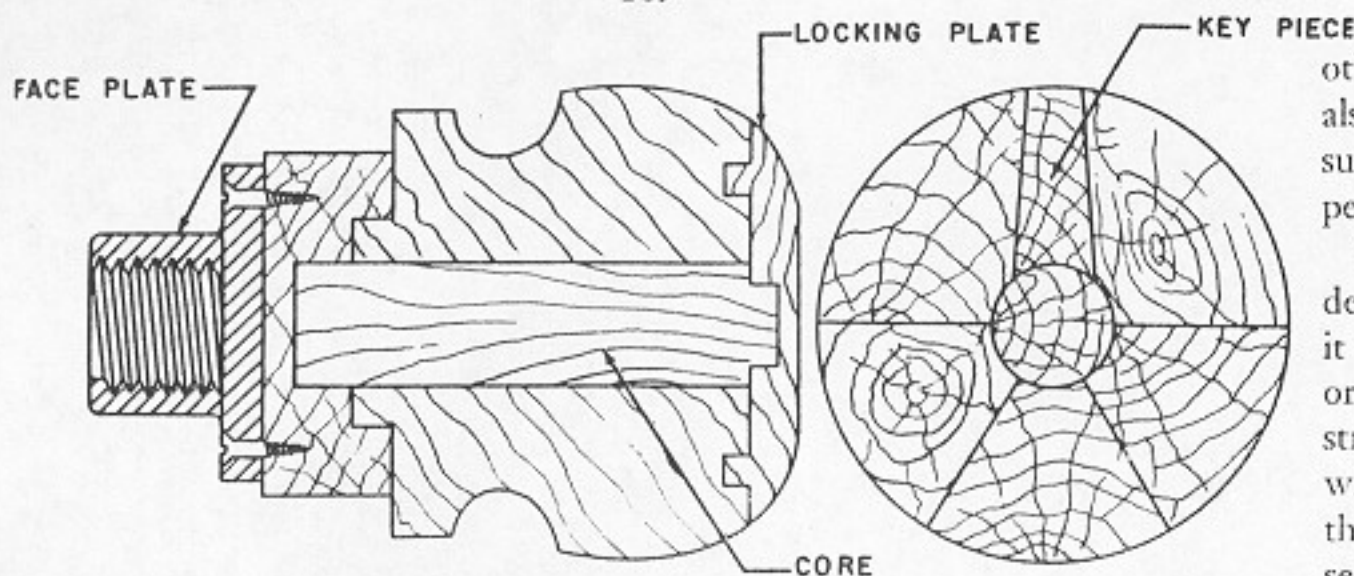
The sectional chuck can be collapsed by removing the locking plate and pulling out the core. The key section can then be removed and the other sections are free.
